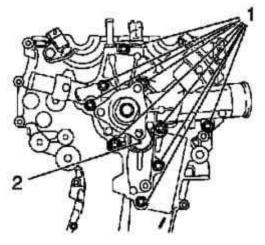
Removing the pump coolant: 1 - mounting screws, 2 - pump coolant
